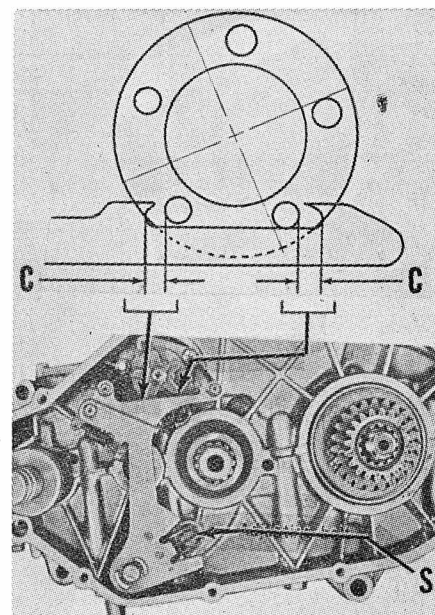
When installing the shift drum and forks, install cotter pins through guide pins in direction shown. Be sure that forks do not touch cotter pins.
